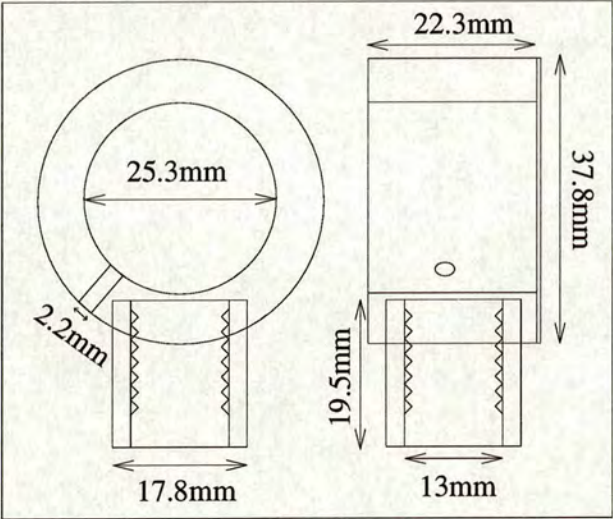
Schematic diagram of the transparent mouthpiece. The mouthpiece was made of three parts - the main barrel of the mouthpiece was made of polished perspex. The front window was made of glass, and the threaded adapter into which the mouthpiece shank was screwed was made of perspex. The perspex parts were glued together with perspex glue, and the glass window was glued to the barrel using silicon glue.
